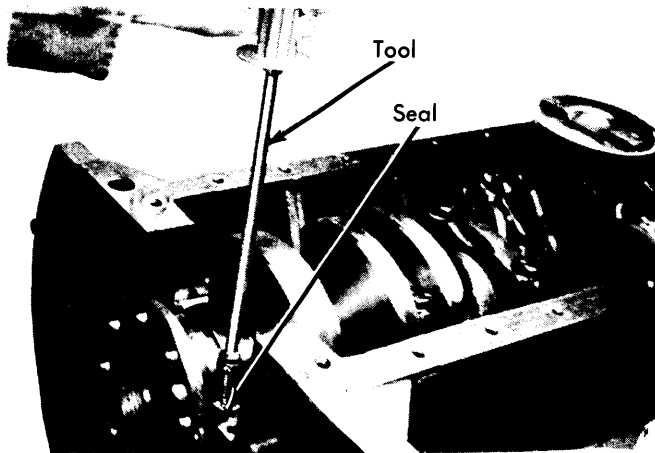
Using Tool on Upper Rear Main Oil Seal
